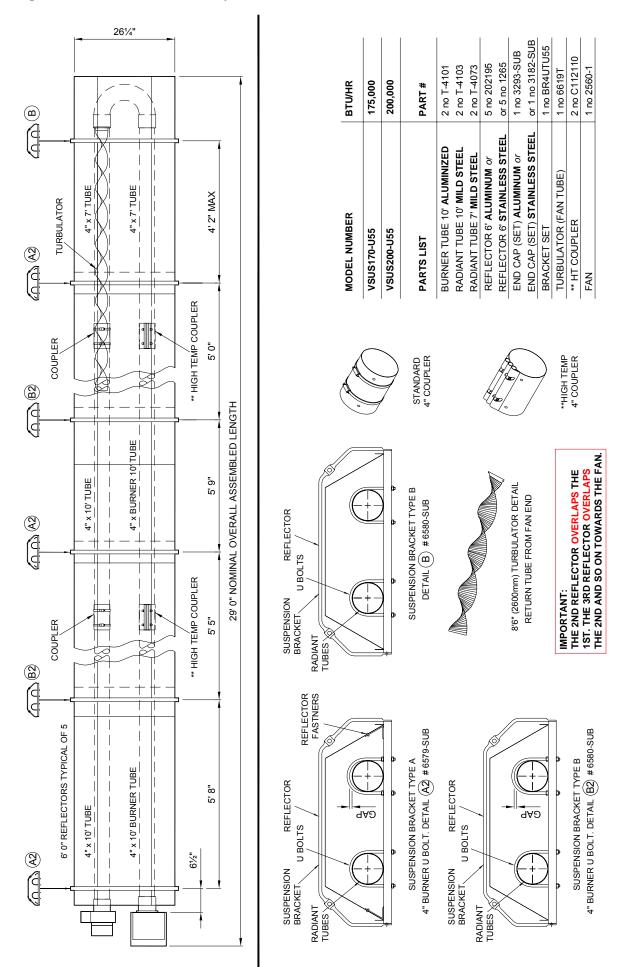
VSUS Heater Assembly: Model U tube 170U65 and 200U65
